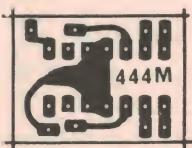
The printed circuit layout of the small board which allows the LM379S to be used on the original board.
